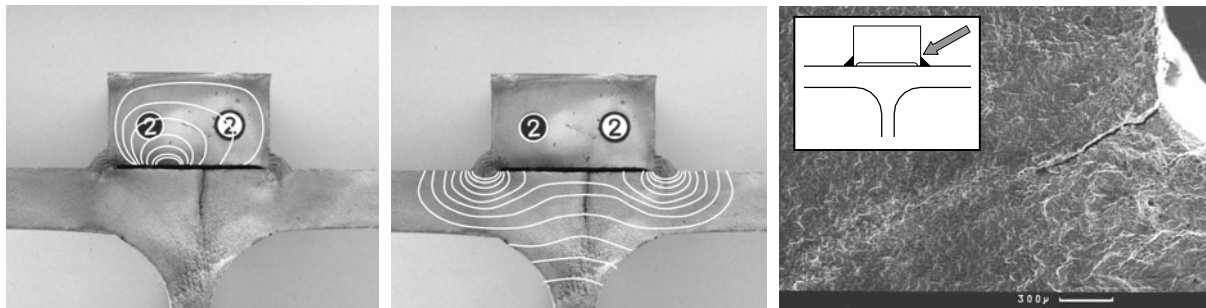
Fracture surface: (a) phase 1, (b) phase 3 of primary crack's propagation; (c) secondary crack at the weld toe
